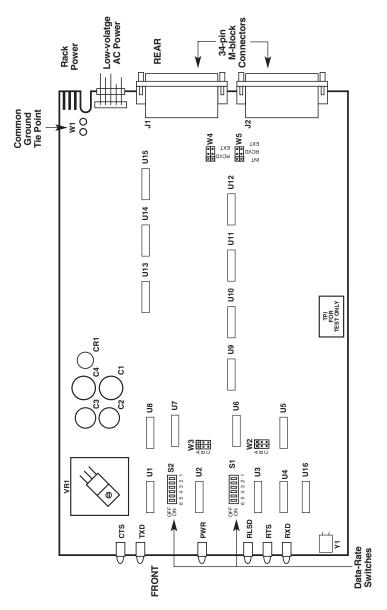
SME–V.35 Printed-Circuit-Board Layout.
